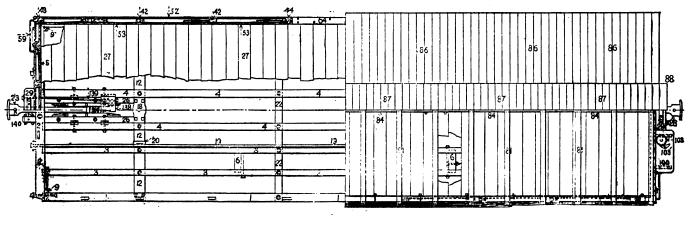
BOX-CAR BODY, NEW YORK CENTRAL RAILROAD. Longitudinal Section.
